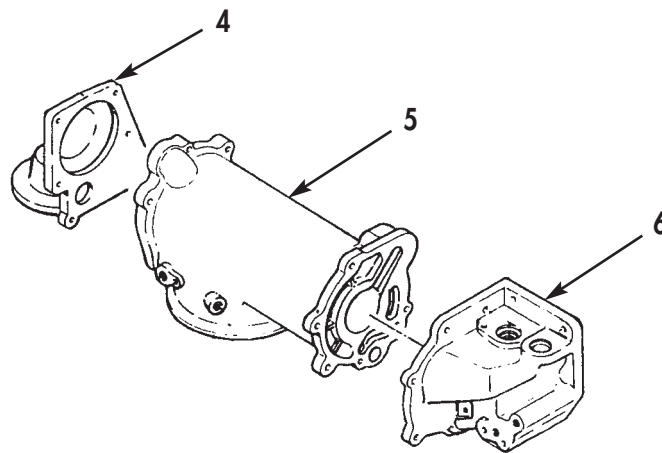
Oil Cooler Cleaning and Inspection—Big Cam III Engine.
